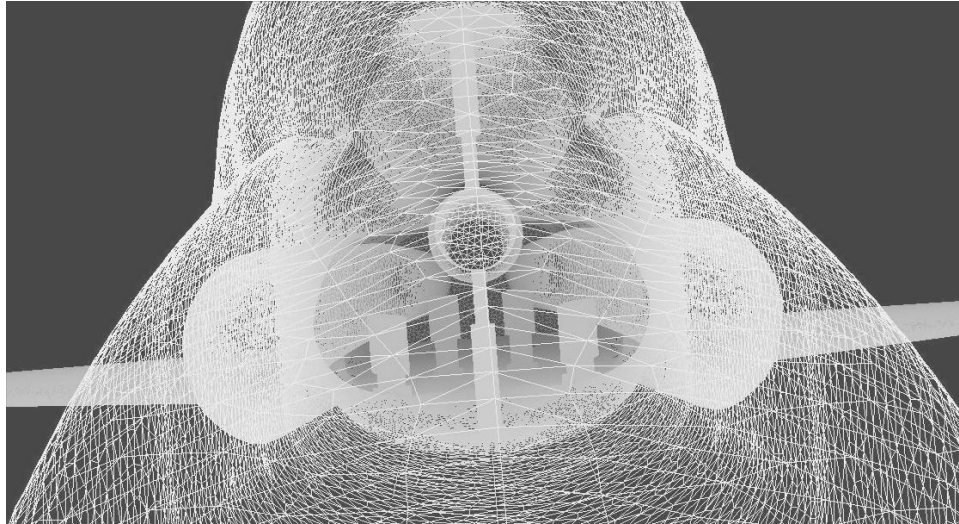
PolyWorks® Front View of Model-to-Balance Screw Holes
